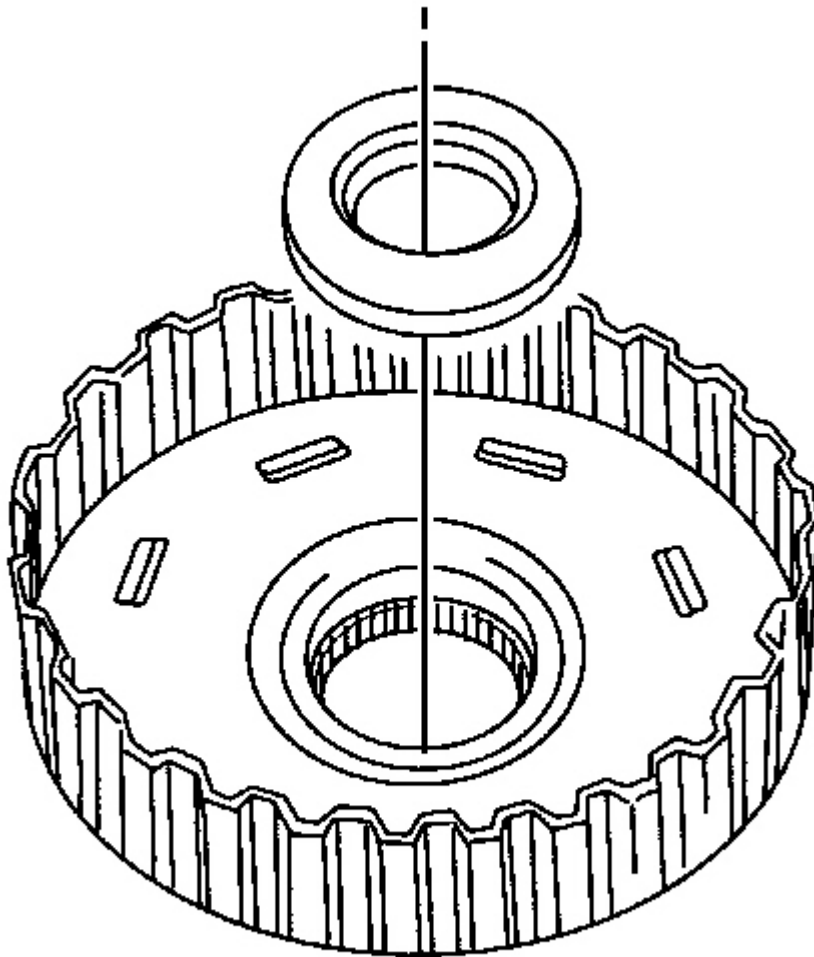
Thrust Bearing Race & Forward Clutch Hub
